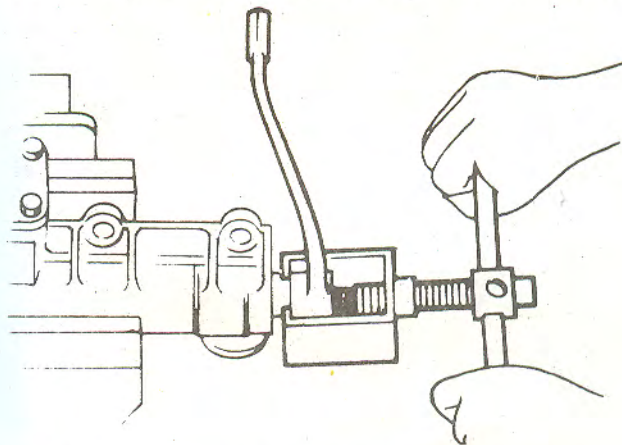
Removal of the steering drop arm (pitman arm).
